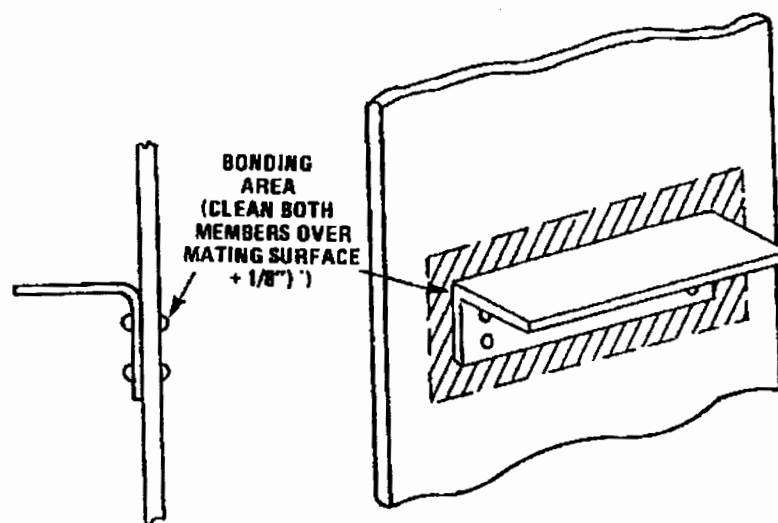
BRACKET INSTALLATION (RIVET OR WELD)
